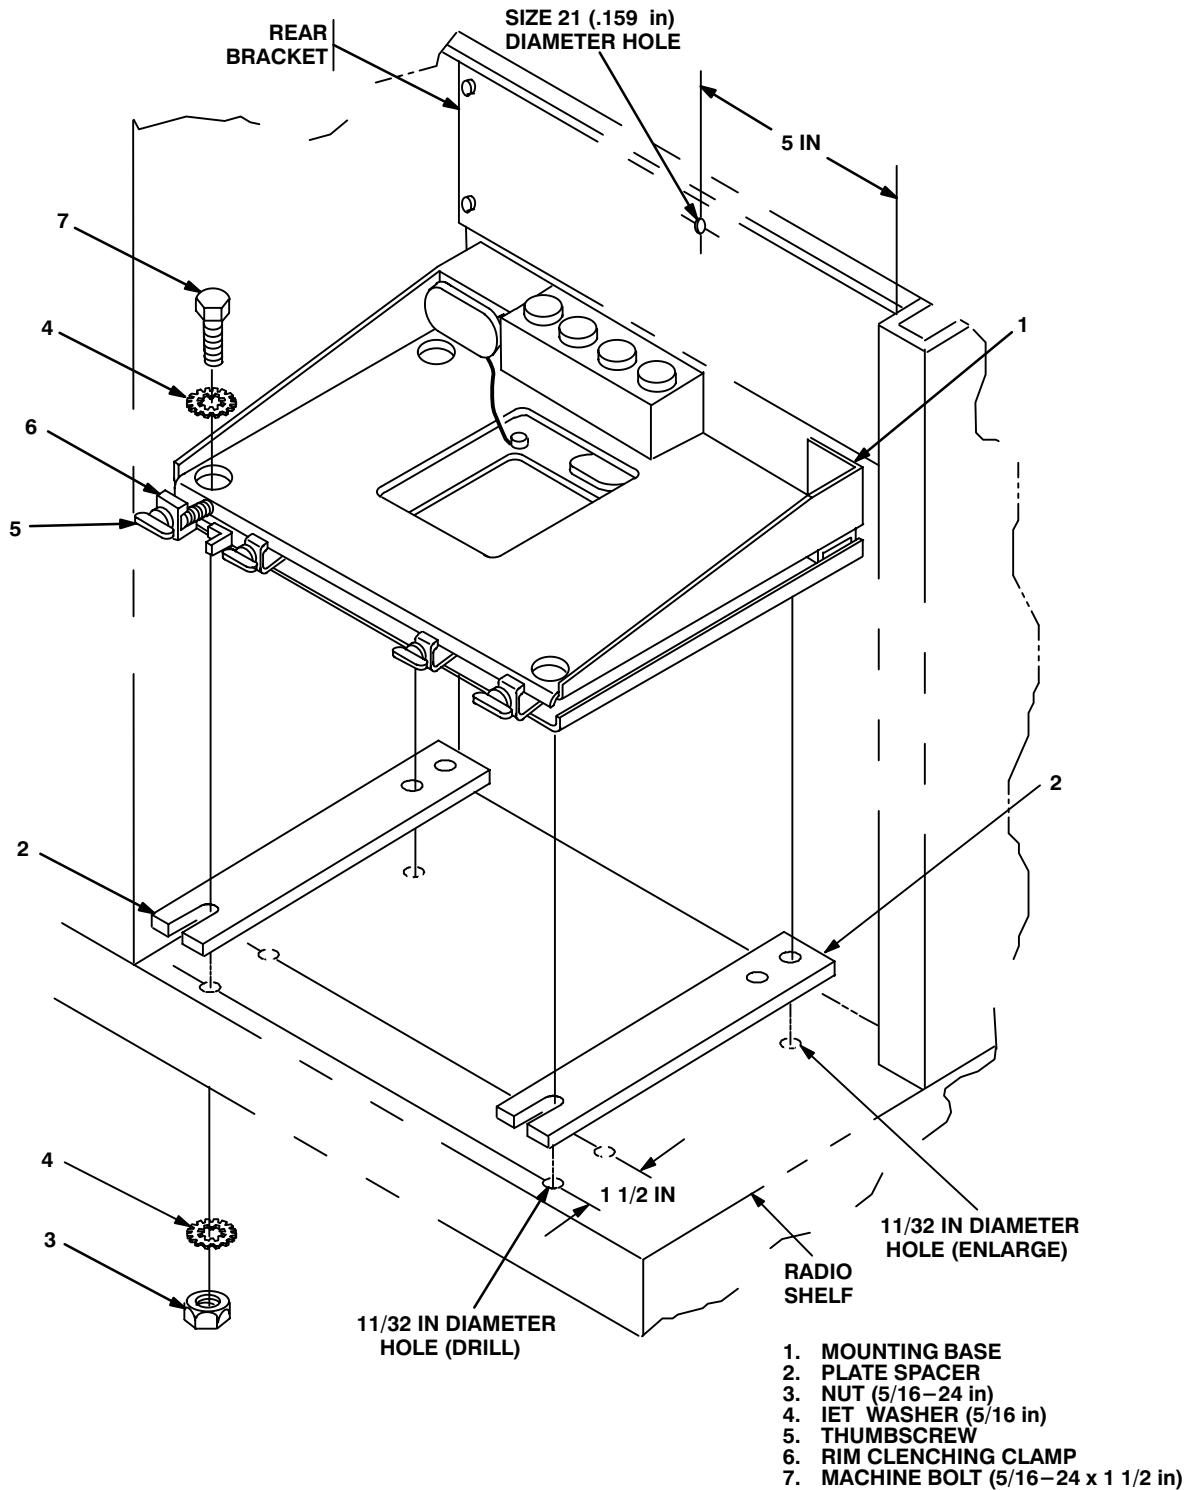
Mounting Base Installation: Curbside Equipment Rack
